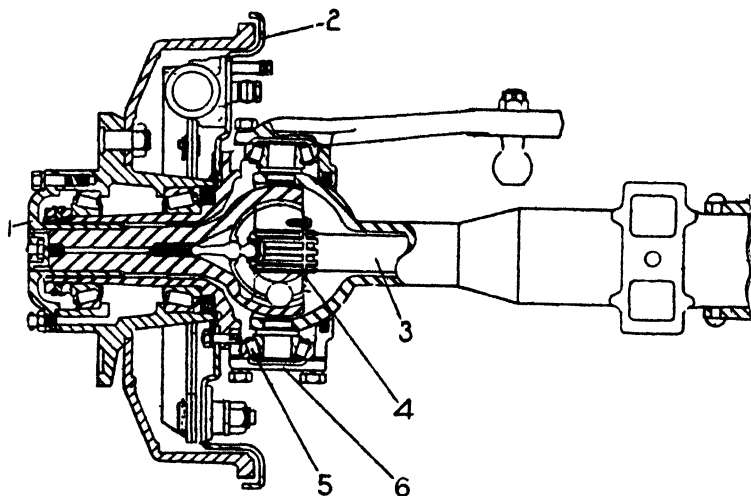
WHEEL END OF TIMKEN FRONT DRIVING AXLE.
